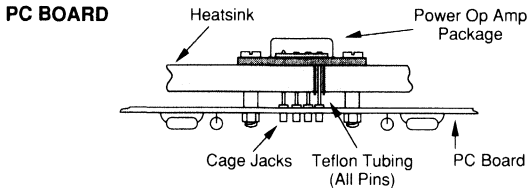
MOUNTING TECHNIQUES (CROSS SECTION VIEWS)
